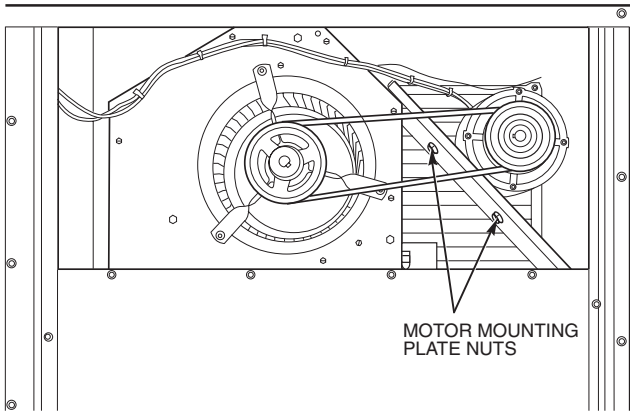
Typical Belt-Drive Motor Mounting for Sizes 008,009
